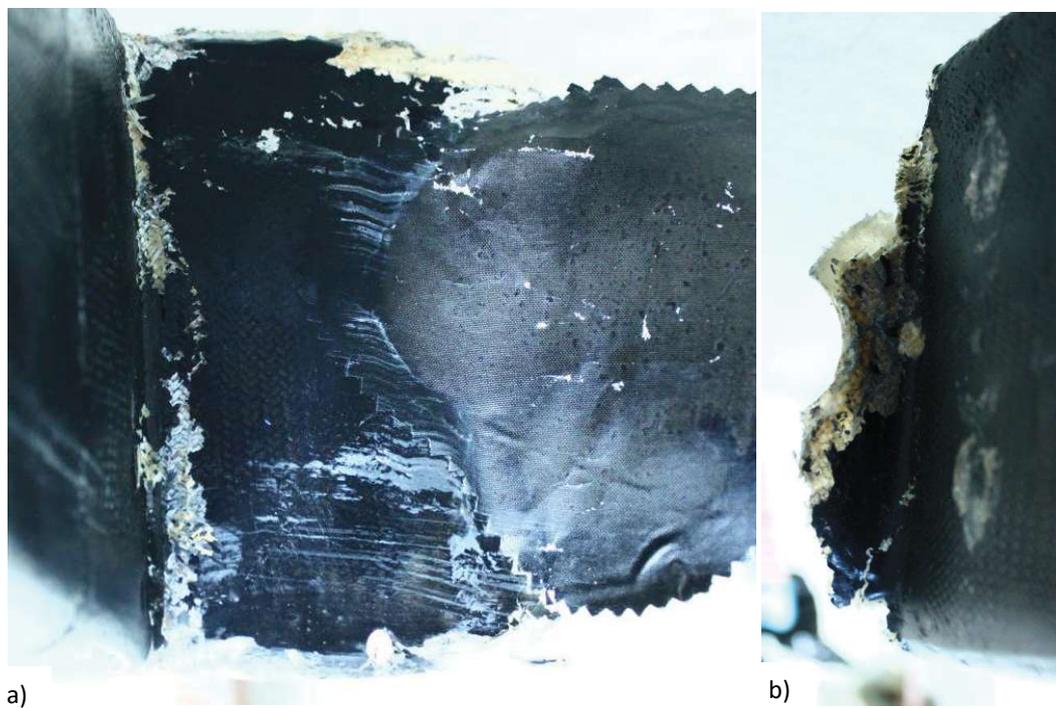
Overview images of the delaminated fabric on the side of a) the front part and b) the back part. The upper flange is always pictured on top.
